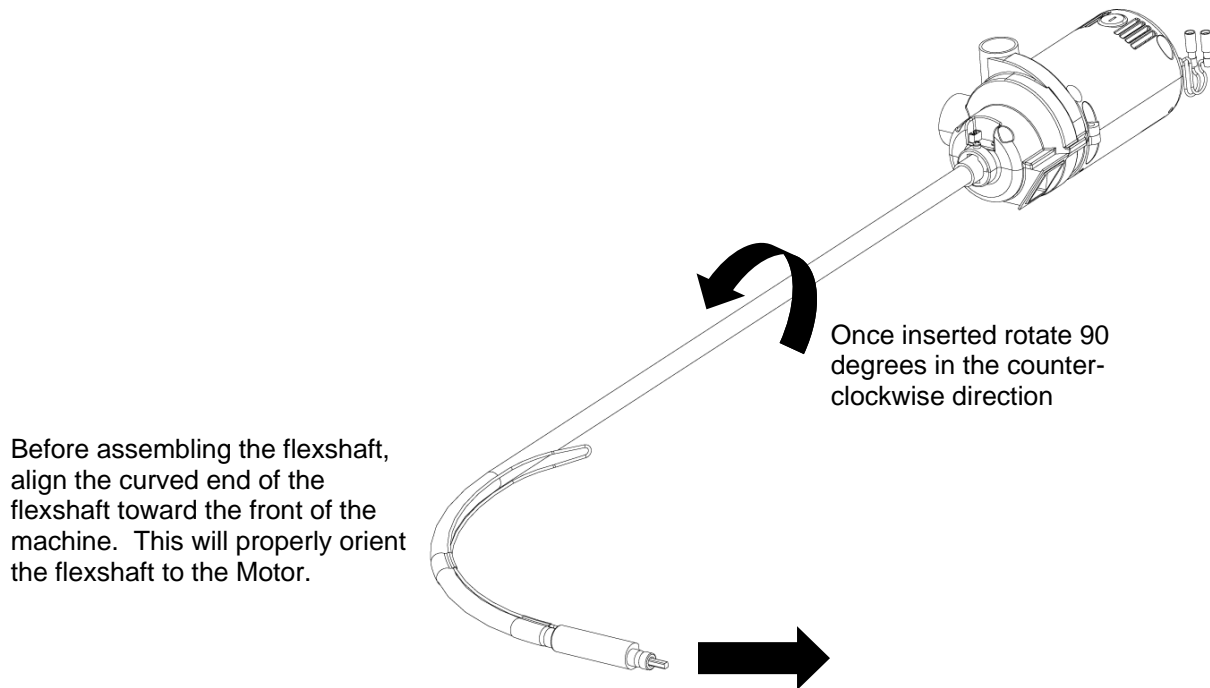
INSERTING THE FLEXSHAFT (SHOWED OUTSIDE THE MACHINE)
